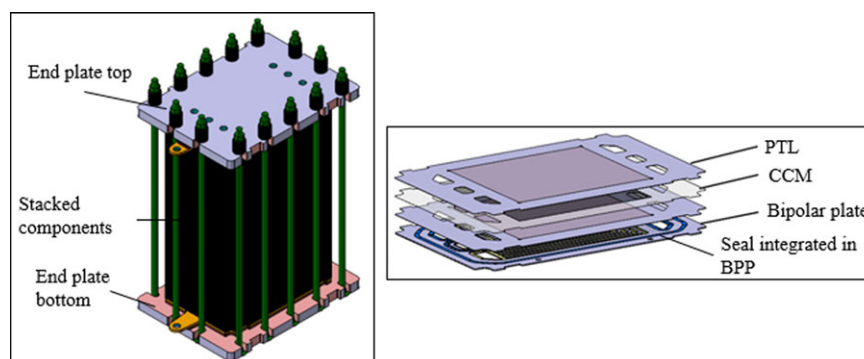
Optimized PEM stack (left) and exploded view of an optimized single cell (right)
